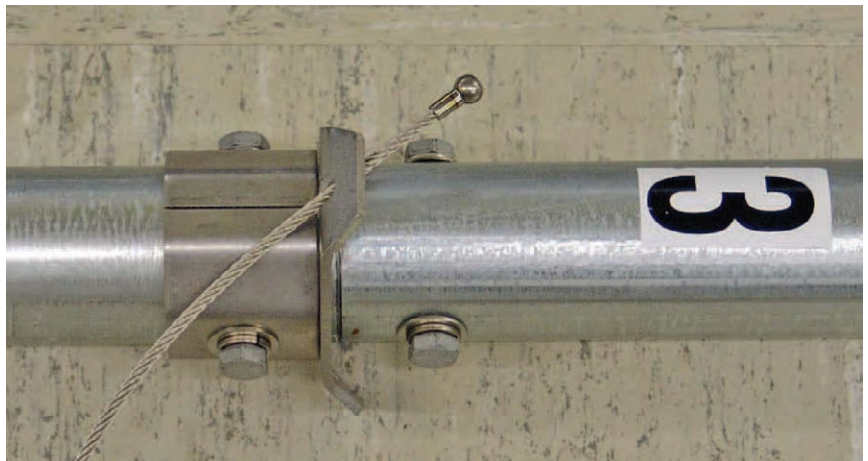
Mast Section 3 and guy ring/collar assembly
